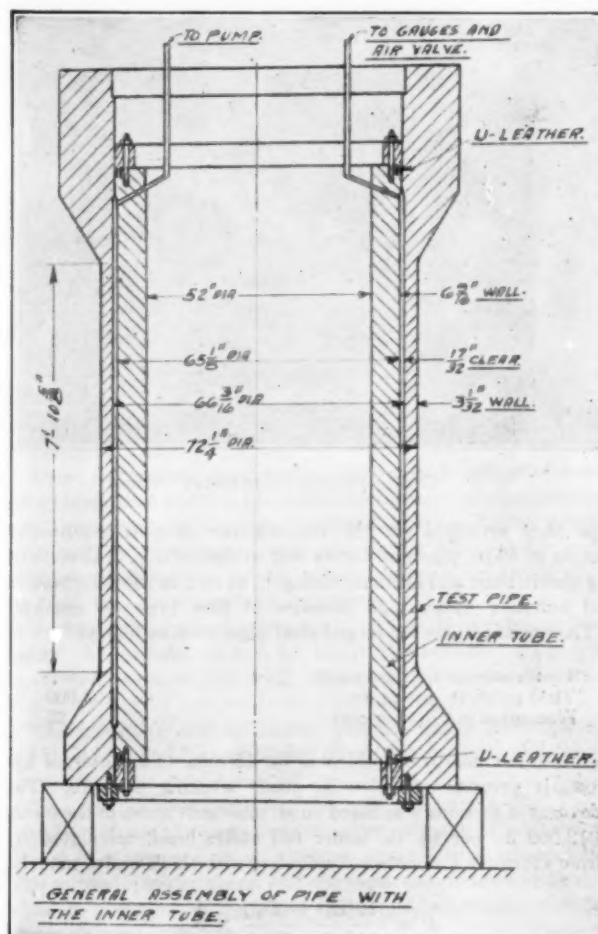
GENERAL ASSEMBLY OF PIPE WITH THE INNER TUBE
